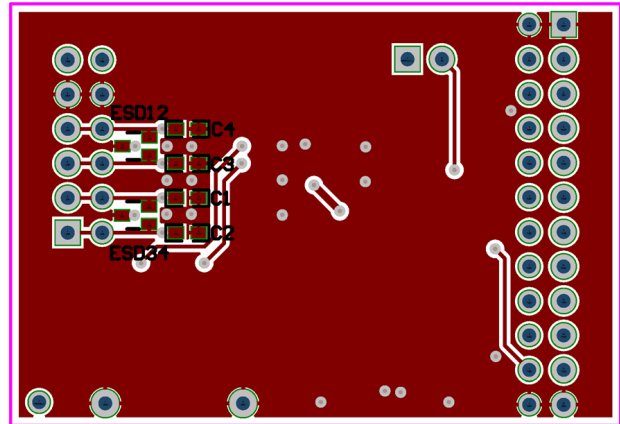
NCV7424 EVB PCB Bottom Drawing (Bottom View)
